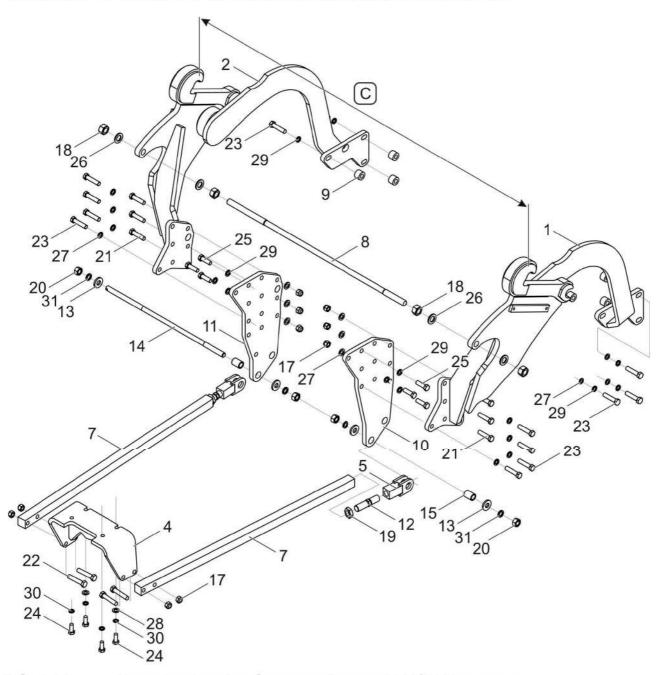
A Mounting bearing frame on Pronar 5110/5130 tractors
